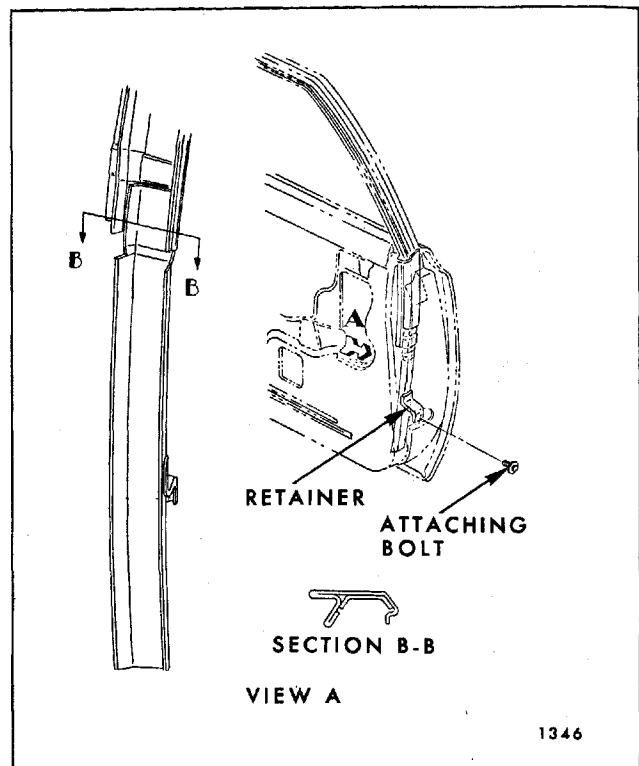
Door Window Glass Run Channel Lower Rear Retainer - "A" Styles
